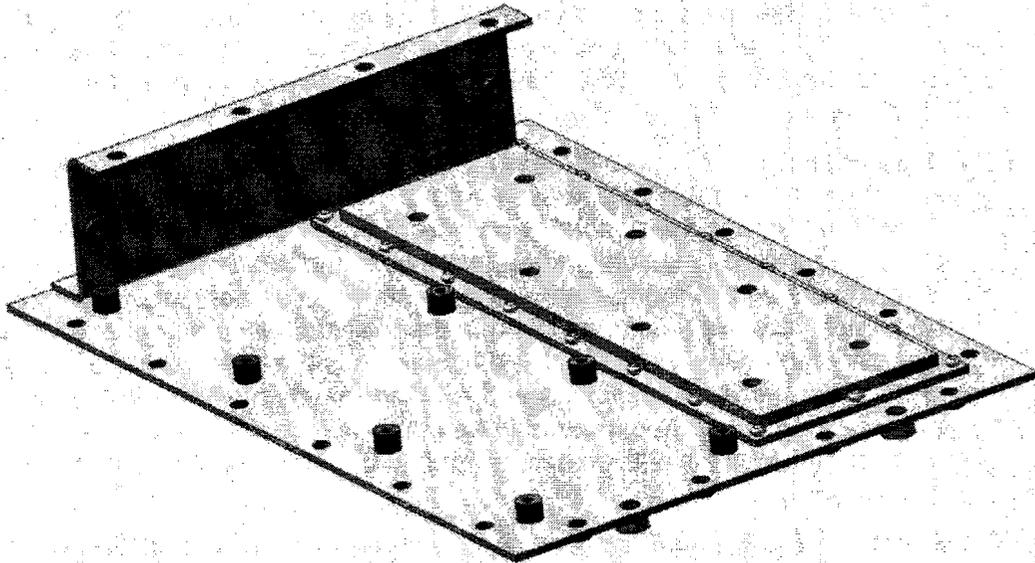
E05 25 Heat Sink Module without PCB and Cover, showing Heat Sink riveted to Baseplate
